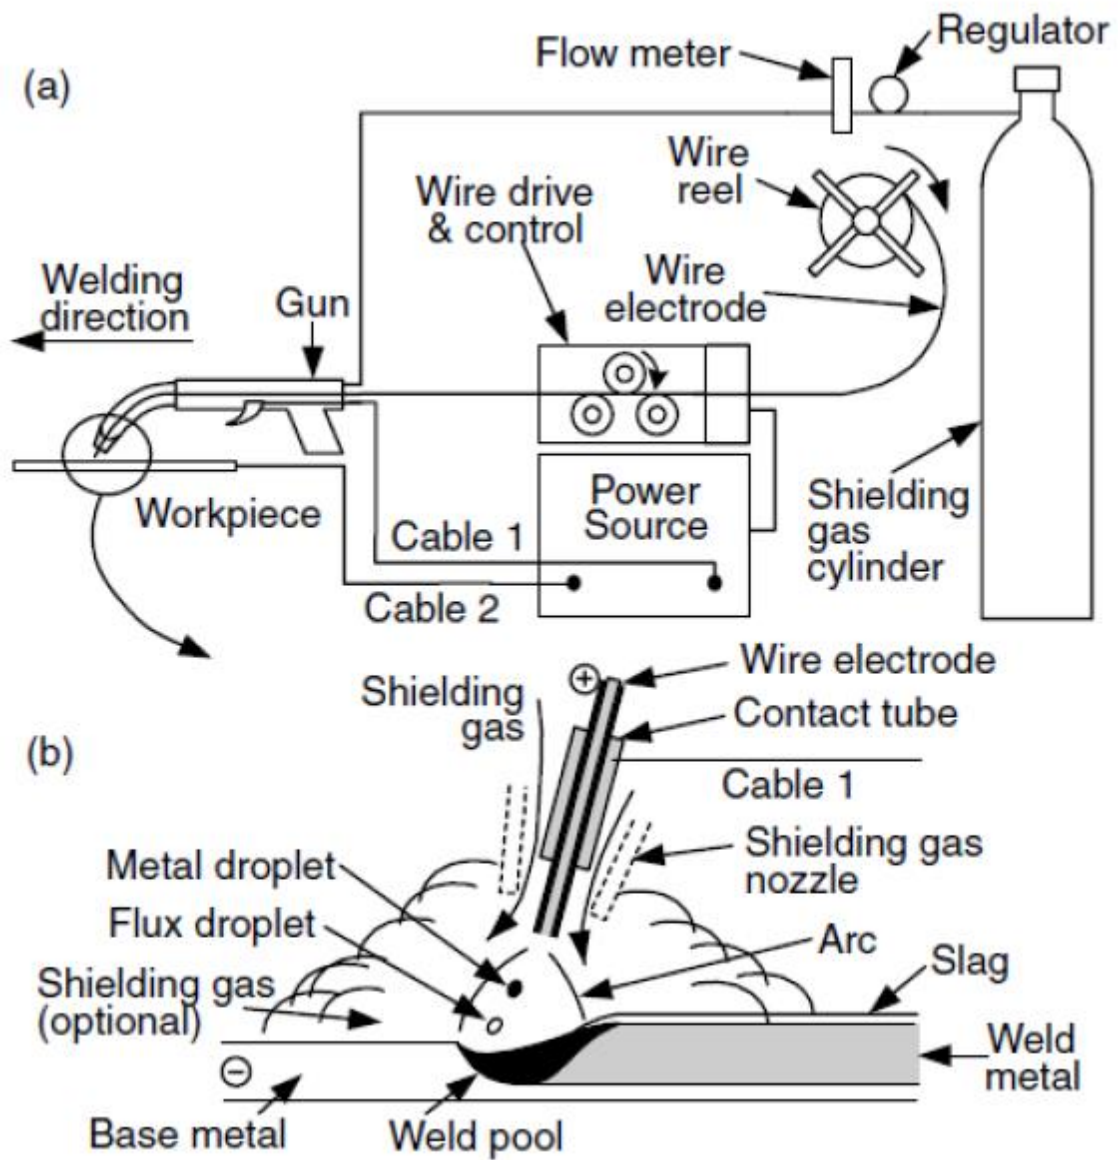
Schematic illustration of the flux cored arc weld: (a) overall process (b) welding area enlarged
